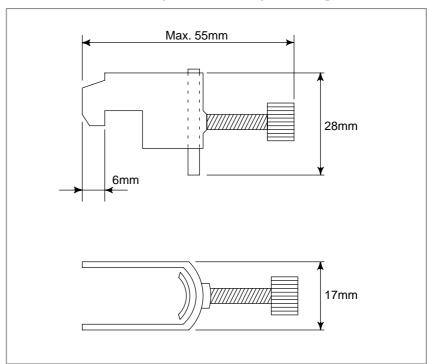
(e) Outer drawings of metal fittings for clamp
